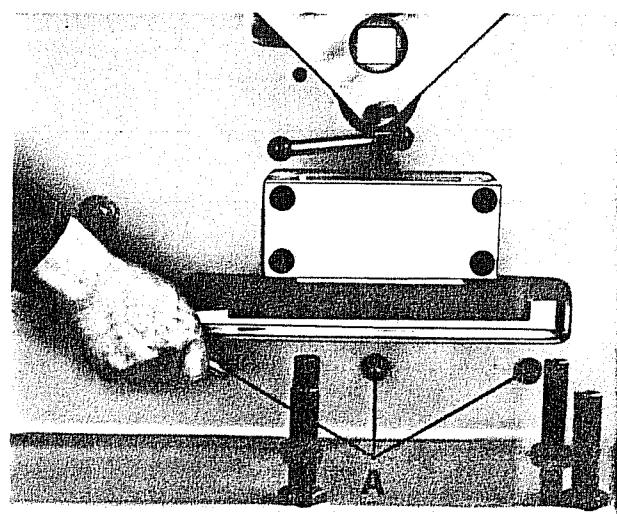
Changing the lower flat steel blade (KBLH 300)
